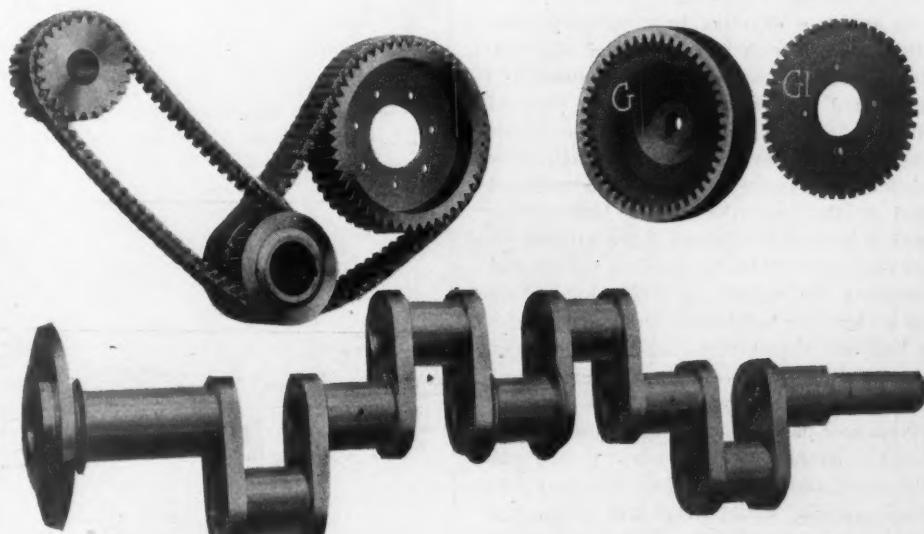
FIVE-BEARING CRANKSHAFT AND CHAIN ECCENTRIC AND MAGNETO DRIVE
